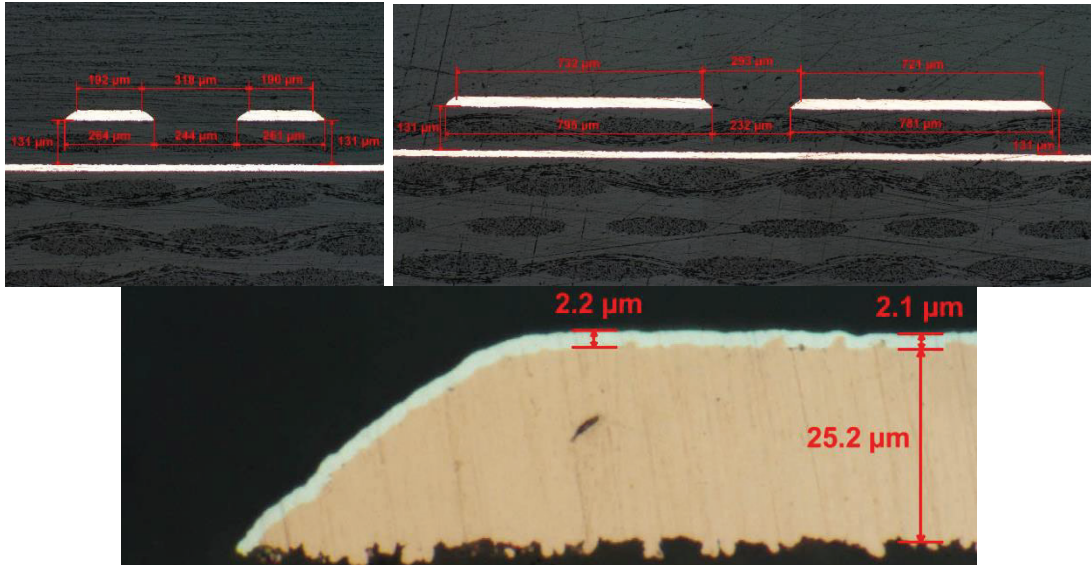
Cross-sections of the differential microstrip Beatty standard PCB test board.
